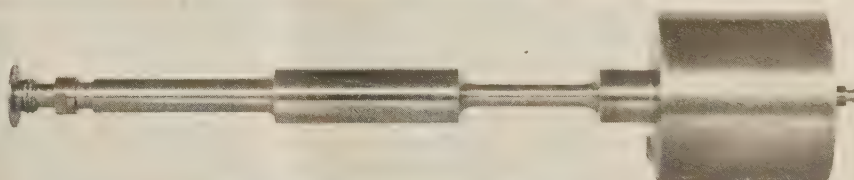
SHAFT No. 3 FOR HIGH-SPEED BEARING TESTS WITH 42-LB WEIGHT SHRUNK ON
